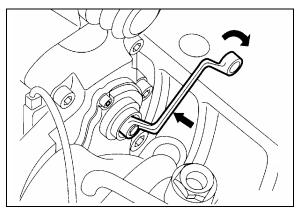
BOX WRENCH ON ADJUSTER PINION
